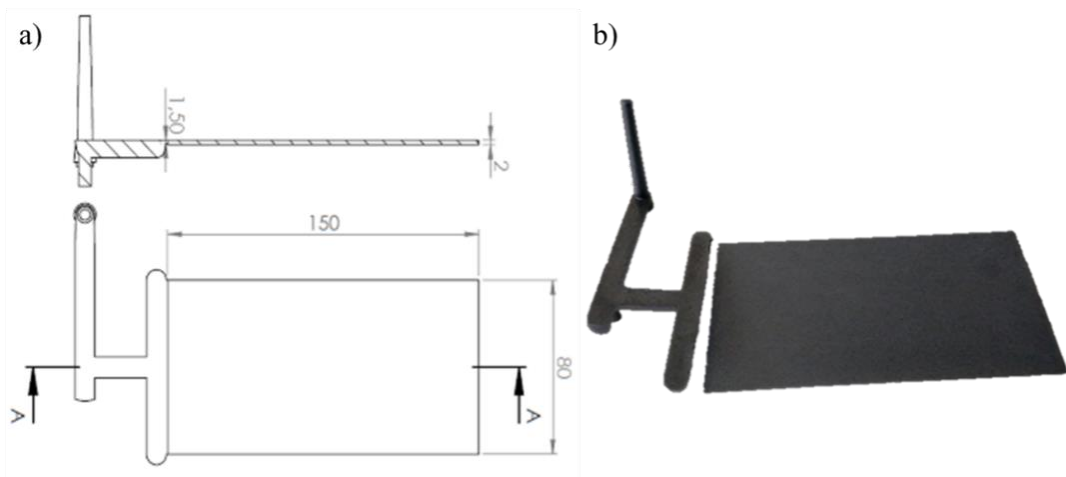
Injection moulding samples: a) Generic dimensions; b) sample picture
